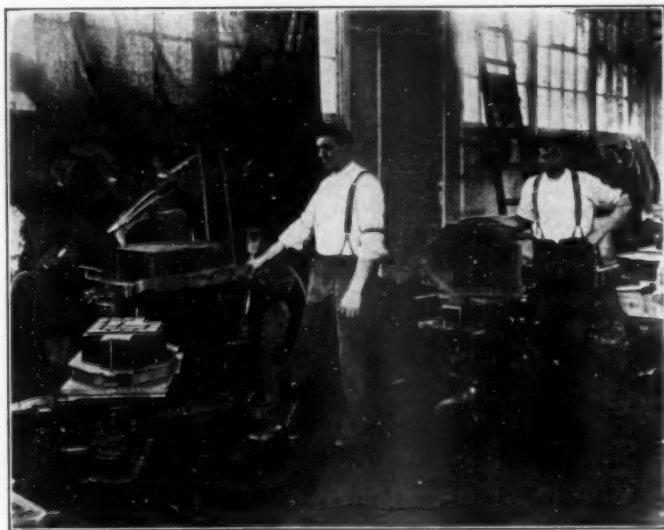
OSBORN DIRECT-DRAW ROLL-OVER MOLDING MACHINE. THE FINISHED MOLD.
